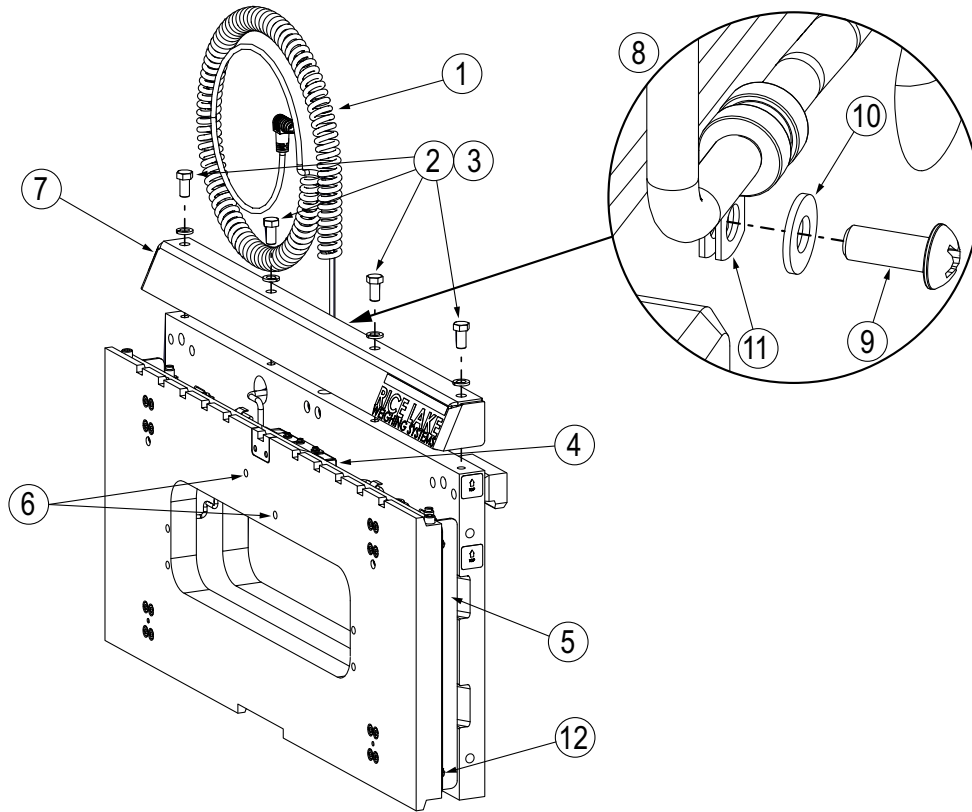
Cargo Lift Scale Assembly Parts Illustration (PN 226802)
